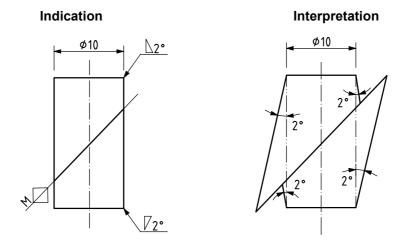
Inclined parting surface on a part with a numerical specified draft
